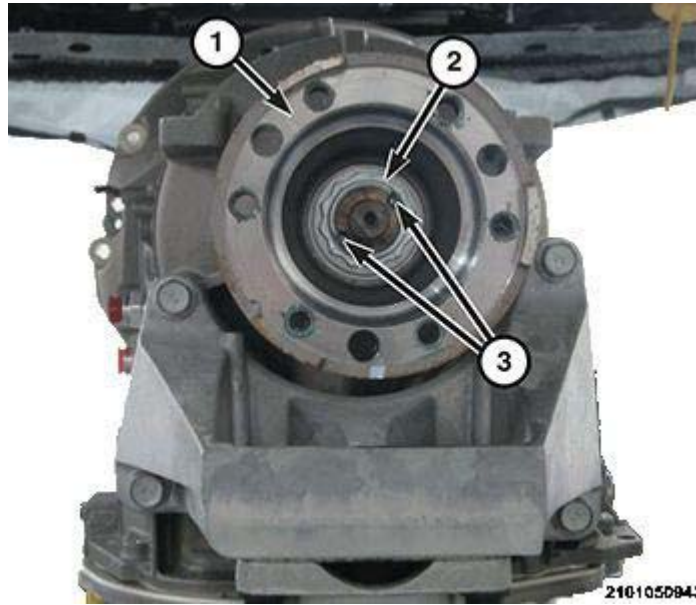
Drive Shaft Flange, Nut & Staking Area
